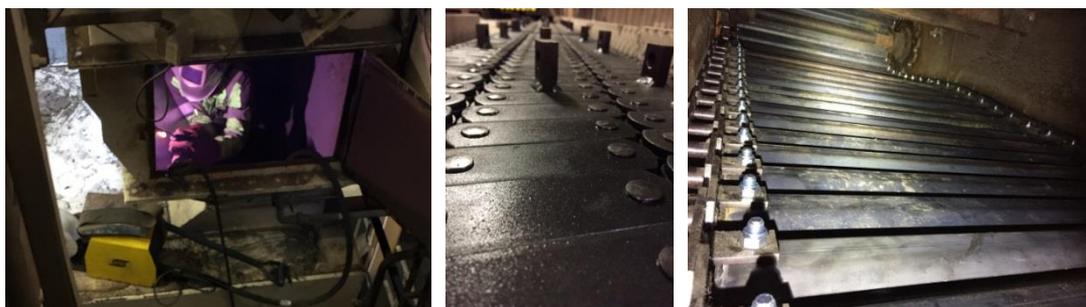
MVV fitter welding a feed hopper, new chain before installation and an internal fuel conveyor with wear parts replaced.
